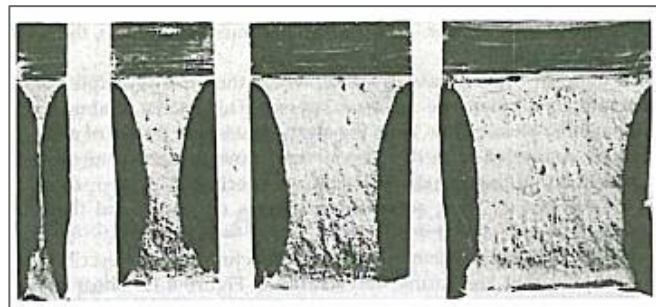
Fracture surfaces of Charpy impact tests for plates with different material thicknesses
